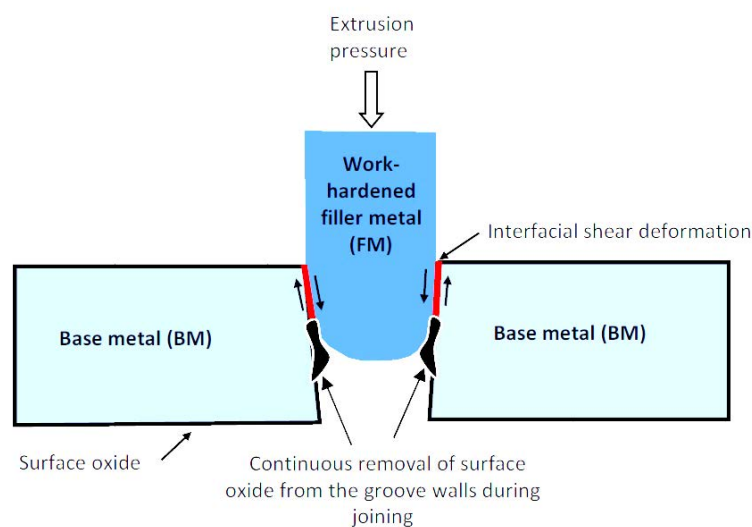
HYB configuration used for similar Al-Al welding .
